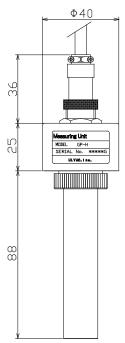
Dimensional drawing for measuring unit GP-H
